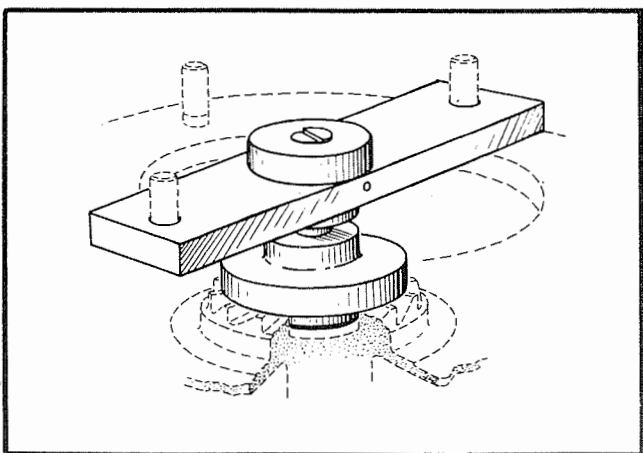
Starter Adapter to Starter Coupling Limit Flush Pin Gage
